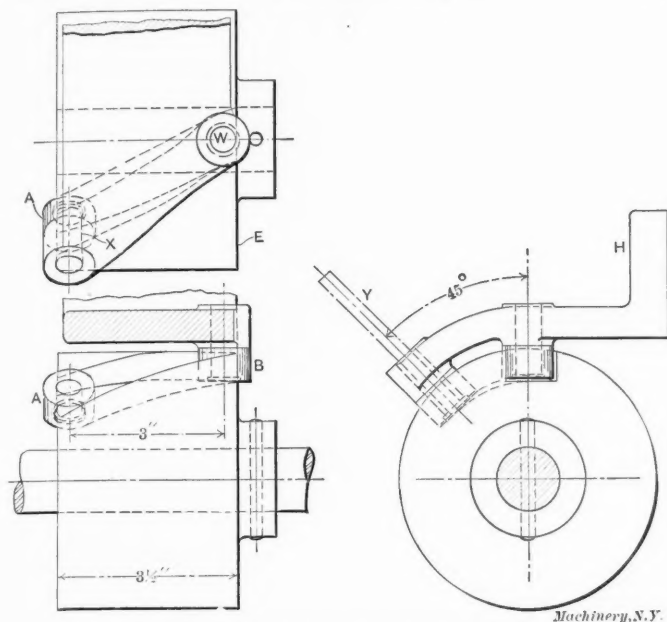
Cam with Two Rollers which reduce its Longitudinal Movement
